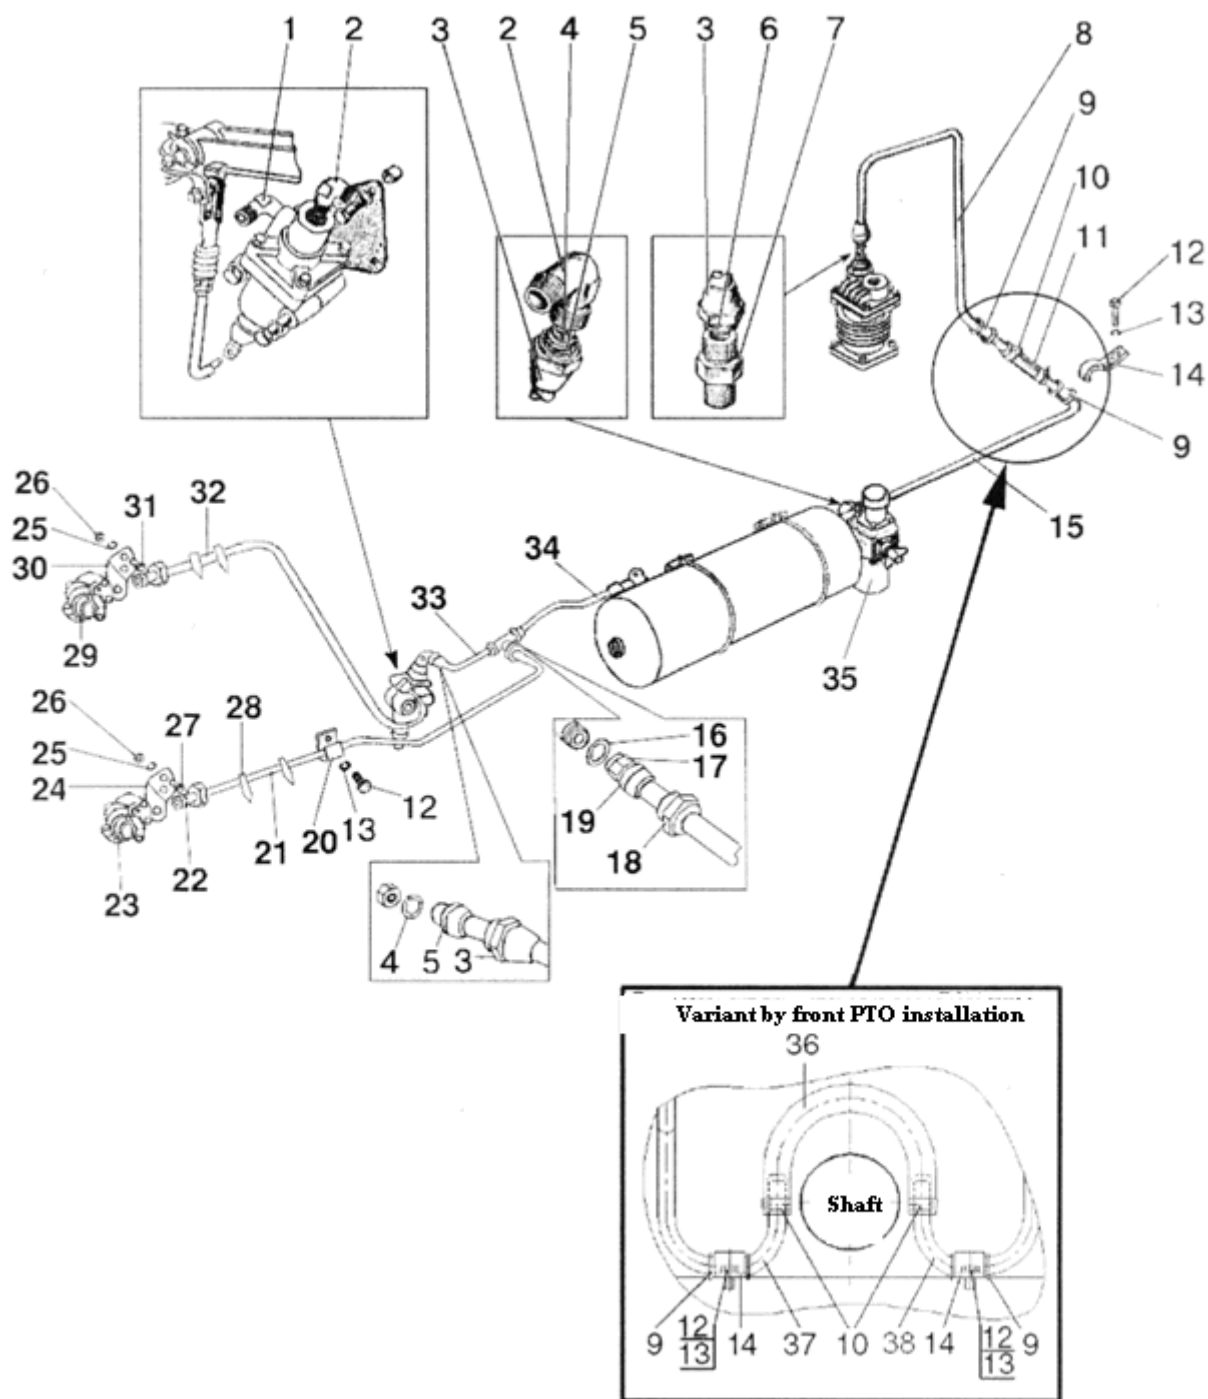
Pipelines and fittings of the double-wire pneumatic drive of the trailer brakes
